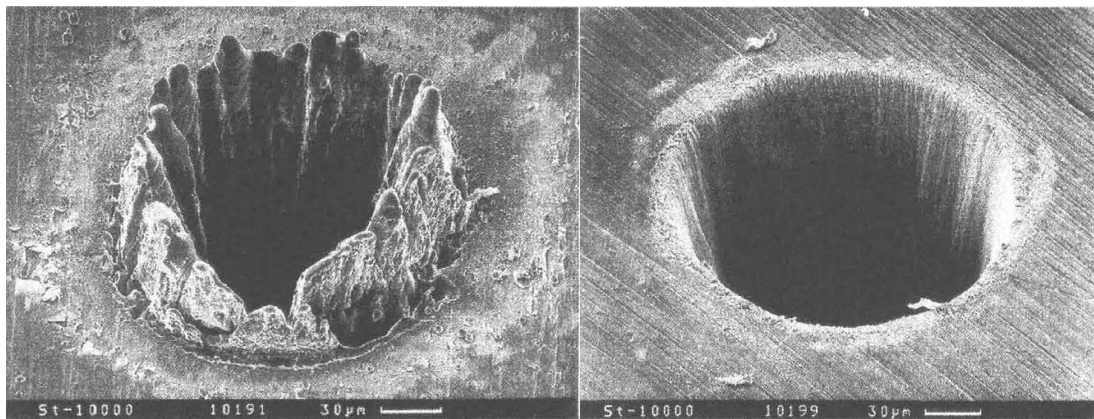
An example of two laser machined holes in stainless steel. The picture on the left is a hole machined using a nanosecond laser pulse and the picture on the right is a hole machined using a femtosecond laser pulse [29].
